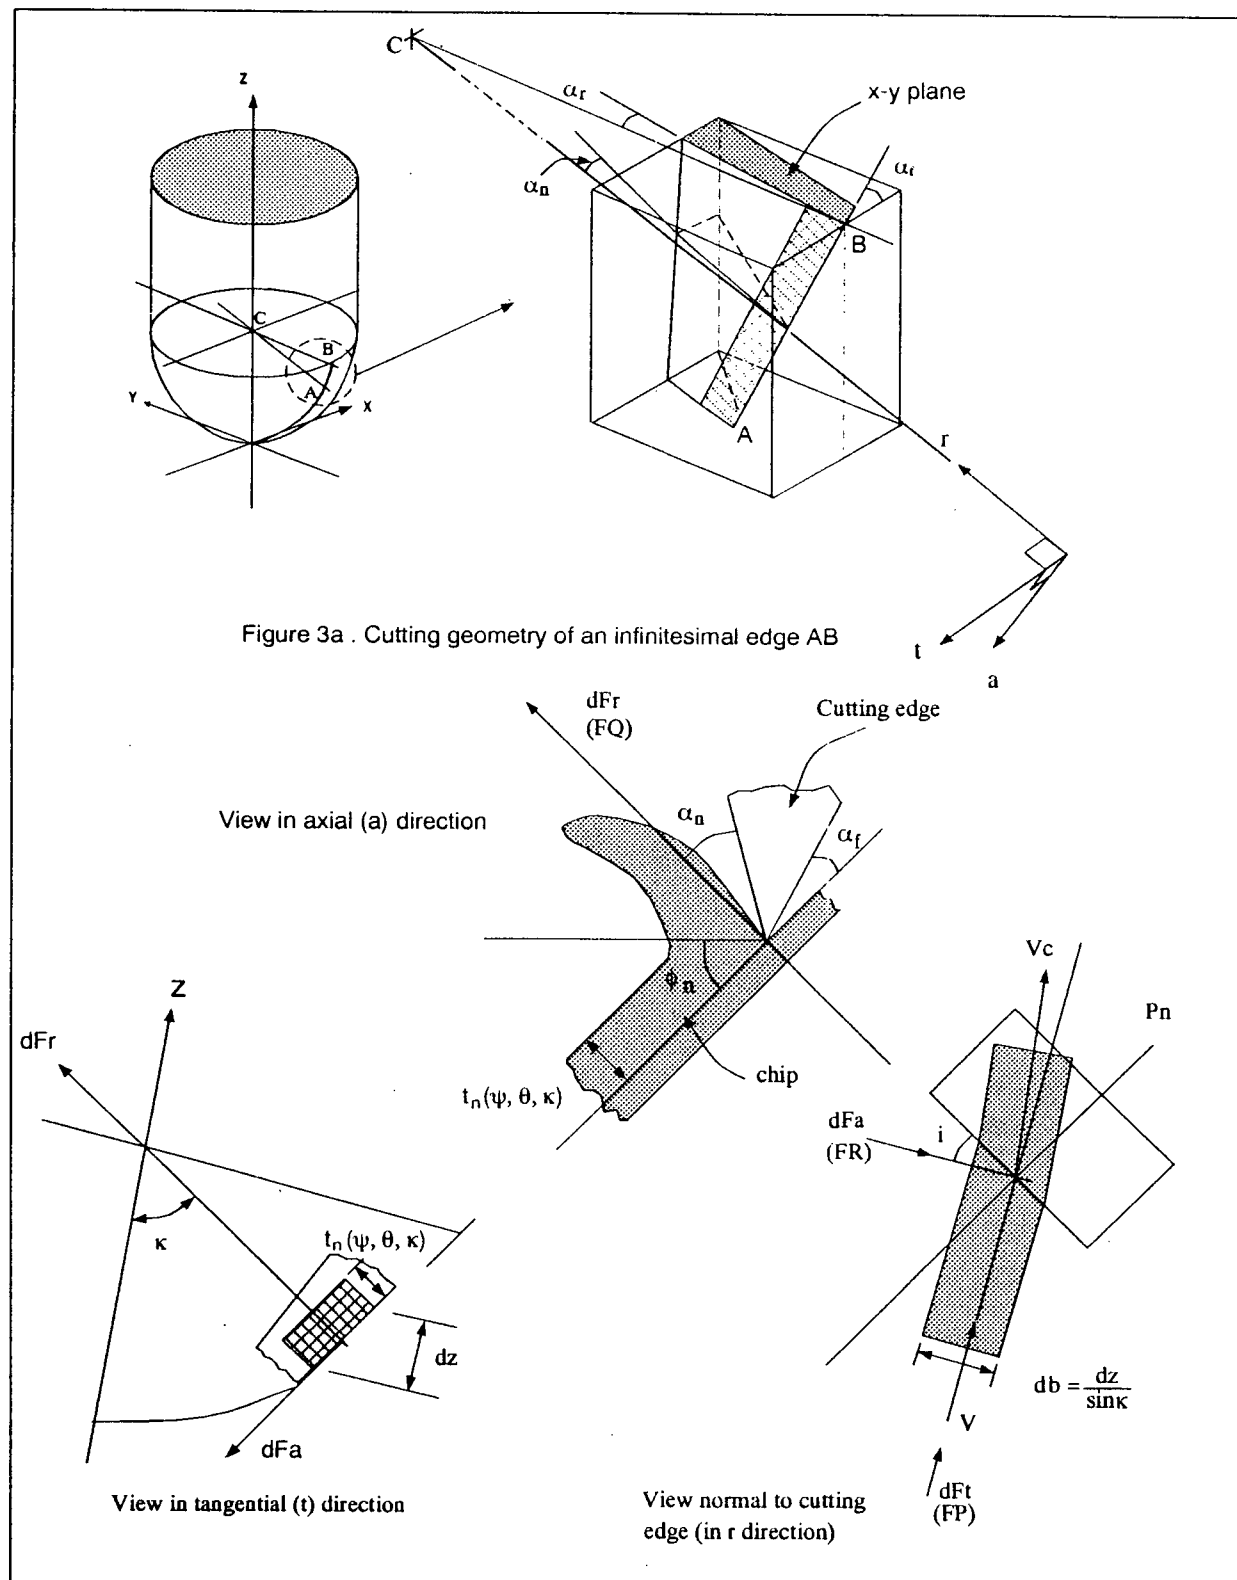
Oblique Cutting Geometry of a Ballend Mill
